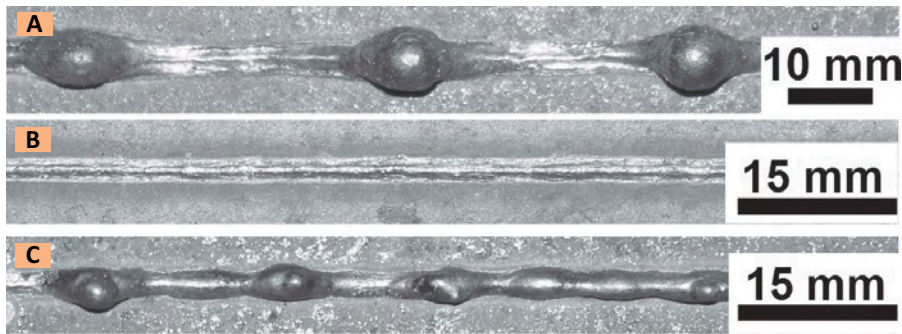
A — The typical weld root defects formed during hybrid laser-gas metal arc welding with a laser power, welding speed, and welding wire feed rate of 5 kW, 30 mm/s, and 229 mm/s, respectively; B — the roots of hybrid welds made under identical process conditions (welds 7, 8) without bottom surface oxide scale; C — with bottom oxide scale. On the plate with scale, root defects formed due to the low surface tension.
